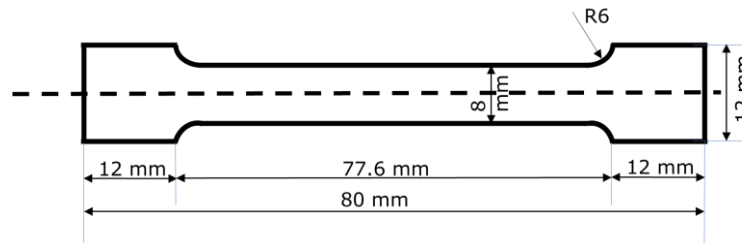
7. Tested specimen: the machined specimen with dimensions.
